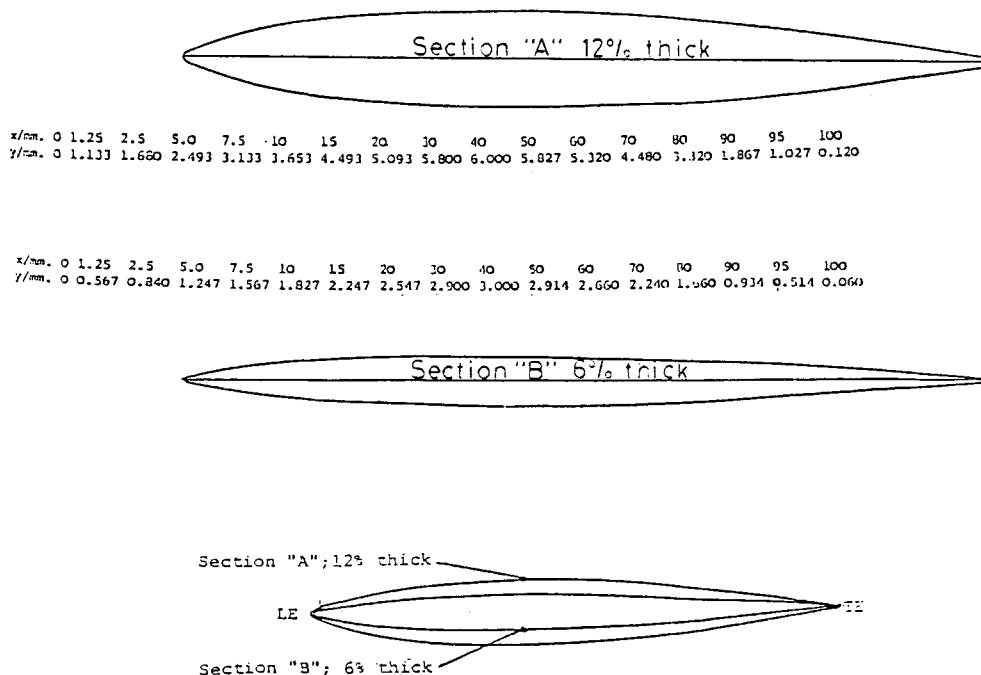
Dawes aerofoil thin and thick sections; all dimensions in millimetres
